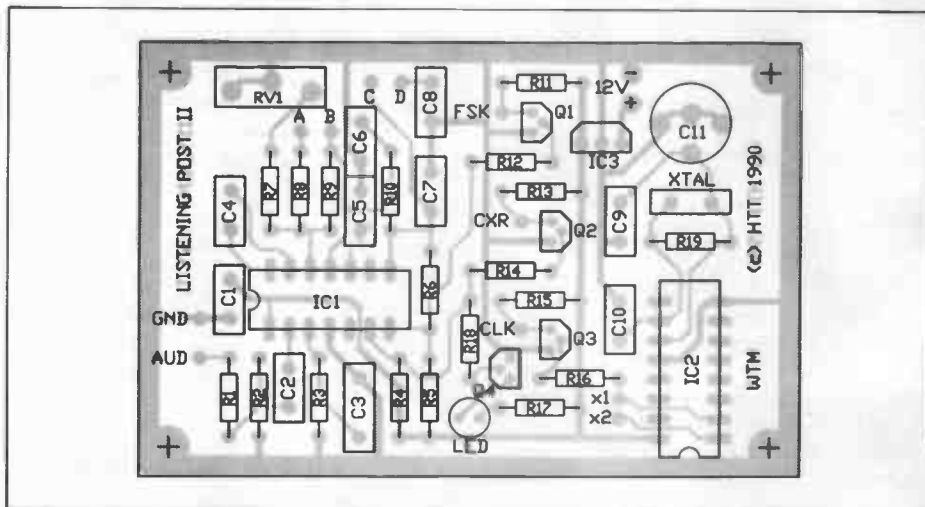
The PCB board wiring overlay, to provide further help in wiring up the decoder.
